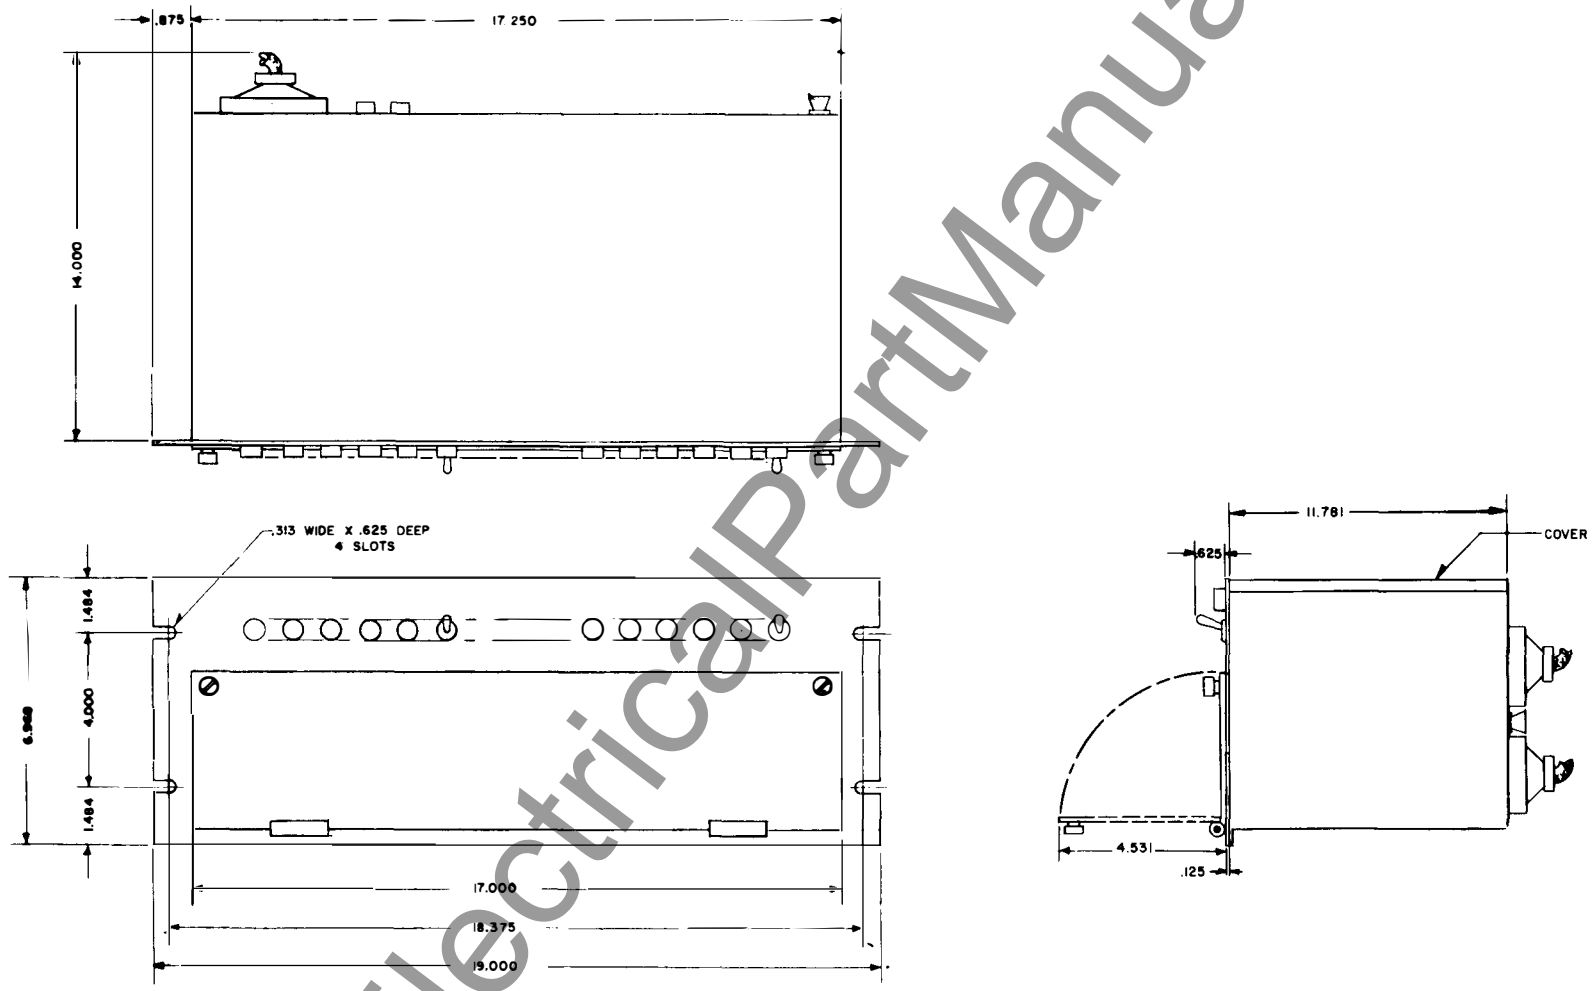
Outline and Drilling Plan of the STU-92 and STU-91 Relays
